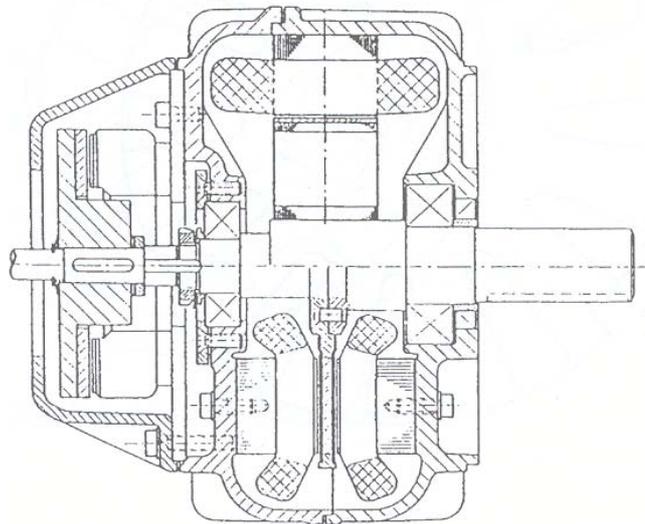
BLDC-Machine of 1.5 kW with Nd-Fe-B magnets; the upper part shows a design with radial flux, the bottom part is a two-sided axial flux machine.
